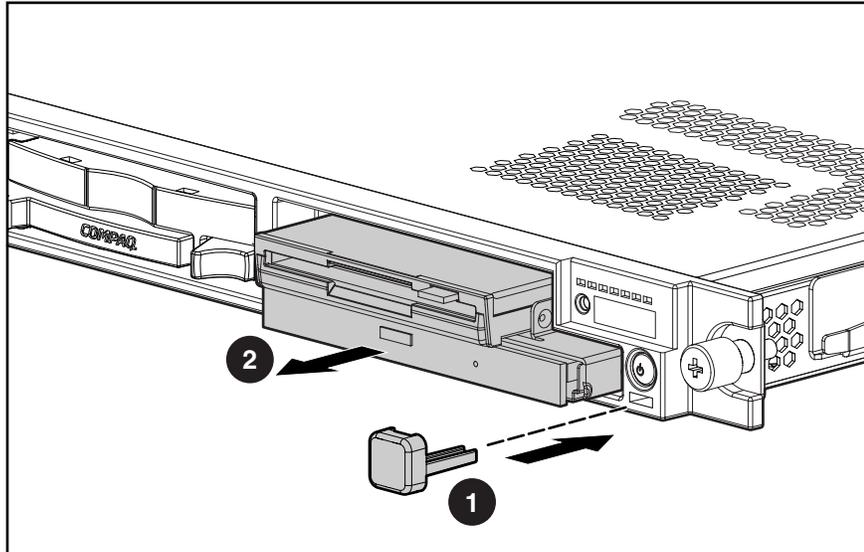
Ejecting the DVD-ROM/diskette drive assembly
